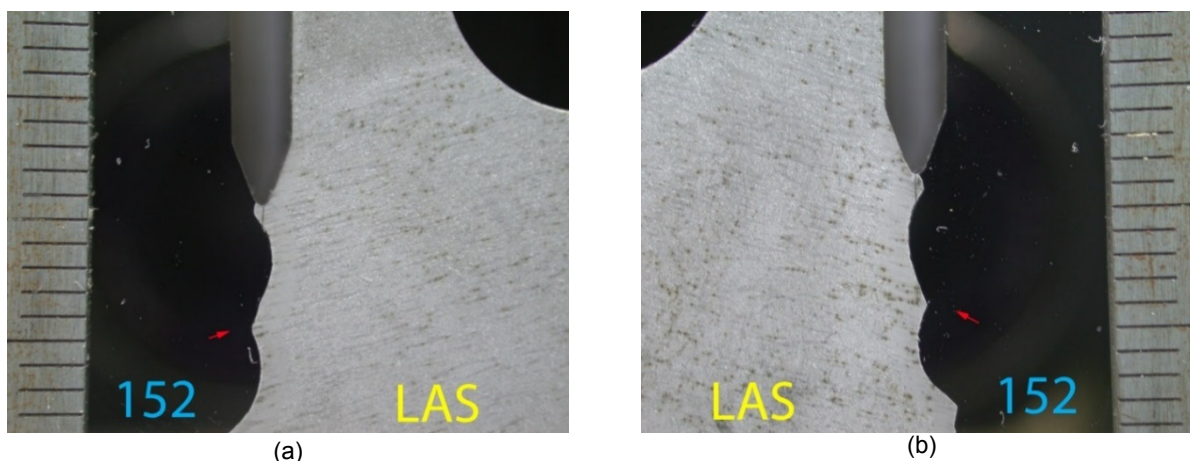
The two sides of the dilution specimen N152-LAS-1 after testing in primary water: (a) side 1, and (b) side 2. The red arrows indicate the approximate location of the end of the test as determined on the fracture surface. Units of the side rulers are mm.
